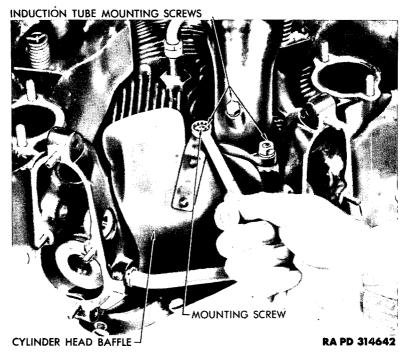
Removing Cylinder Head Baffle Attaching Cap Screw
